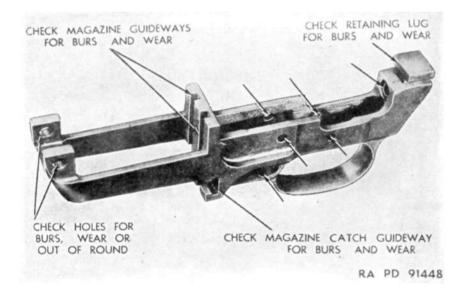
Trigger housing, carbines, cal. .30, Ml and Ml A1 — points of inspection.
